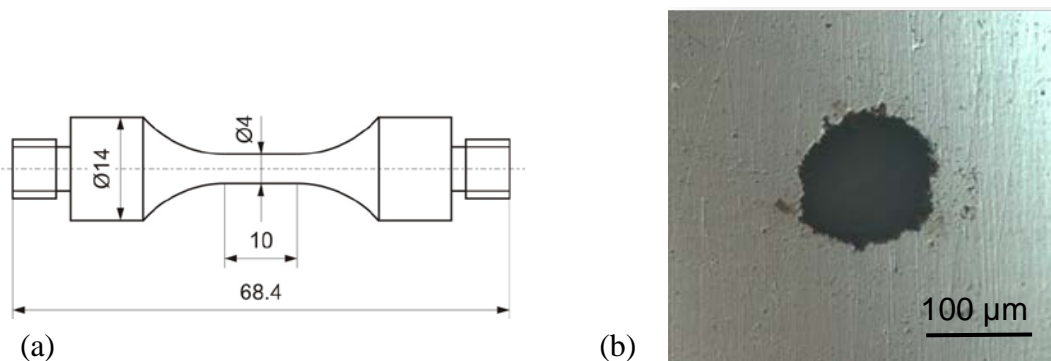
Specimen shape for fatigue life tests (a) and corrosion pit in the gauge lengths of the specimen (b)
